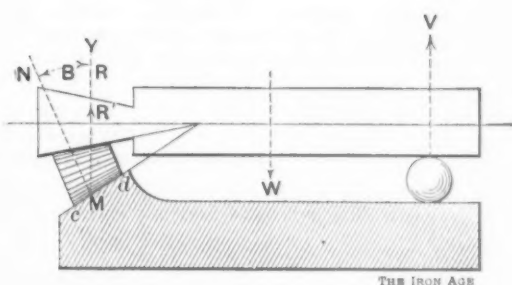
Shaft Supported by Conical Rollers and Balls.
